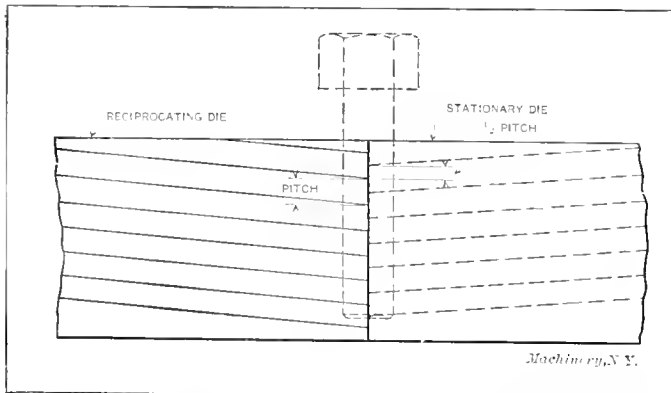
Diagrammatical View showing the Relative Positions of the Thread Rolling Dies when starting to roll a Thread
